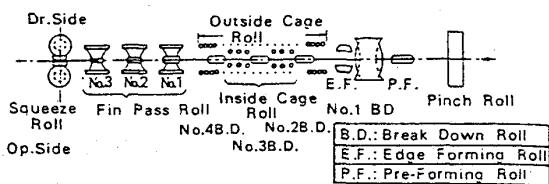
Layout of 26 inch cage forming ERW pipe mill
